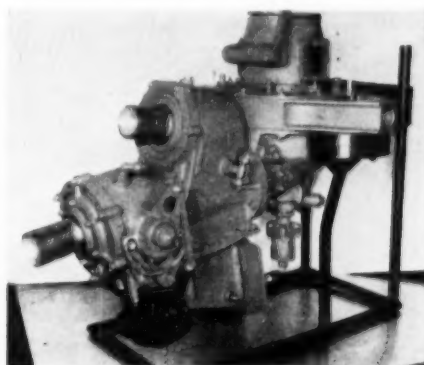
EXTERNAL VIEW OF HUP AFT TRANSMISSION AND CLUTCH
